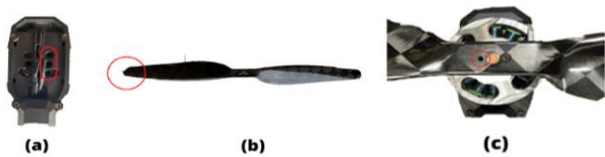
Types of drone faults: (a) motor base screw loosening; (b) propeller damage; (c) propeller mount screw loosening.
